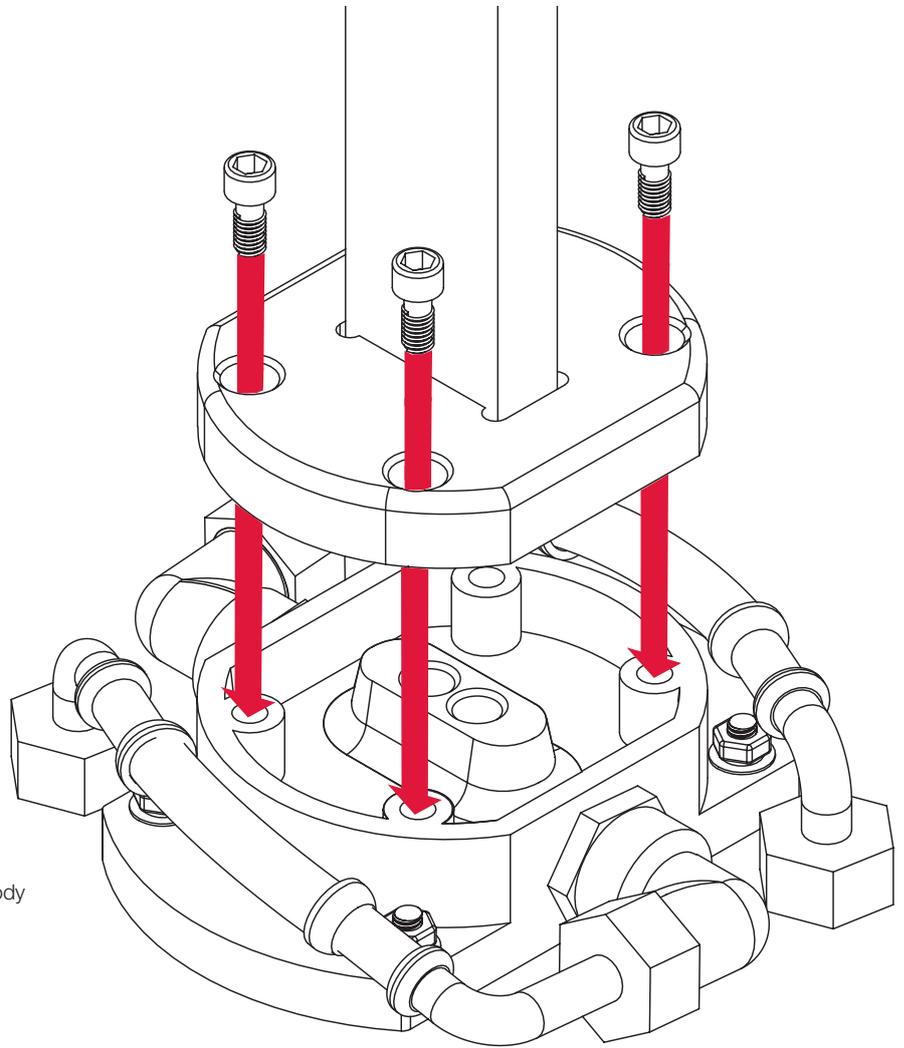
Fig. N. Base mounting screws connecting Bath Filler Mixer body to base.
